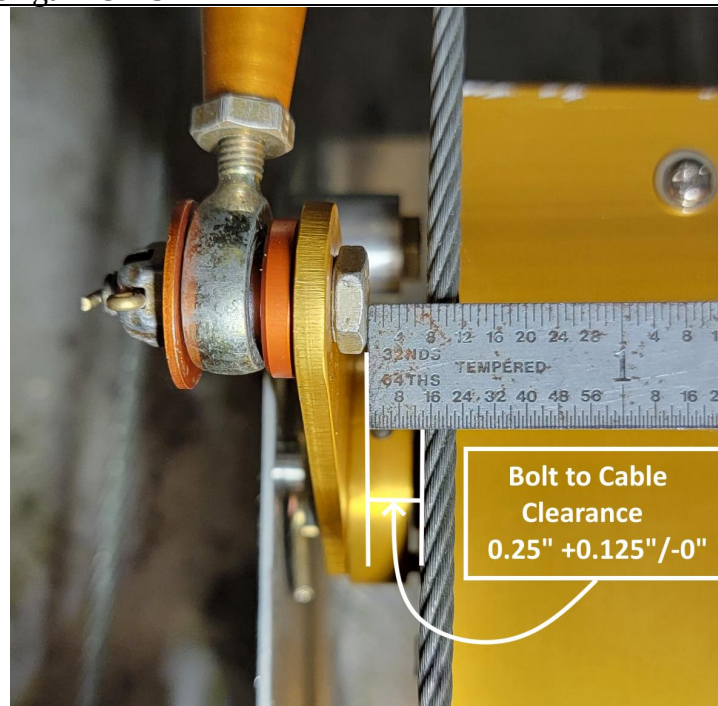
BOLT TO CABLE CLEARANCE
